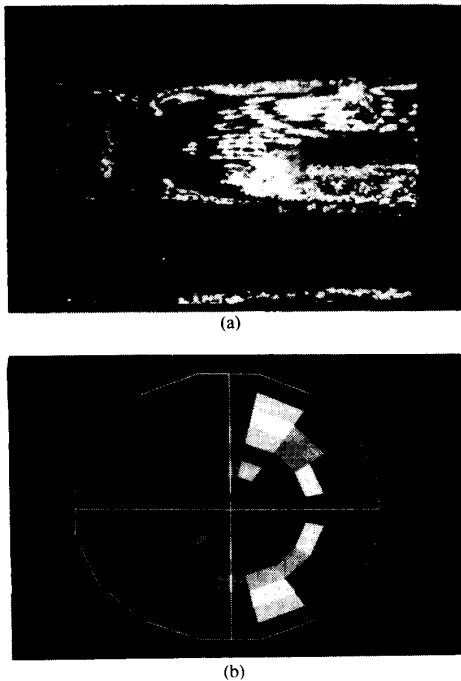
(a) Photograph of the top view of an excess solder joint; (b) Gaussian image of the solder joint shown in (a).
